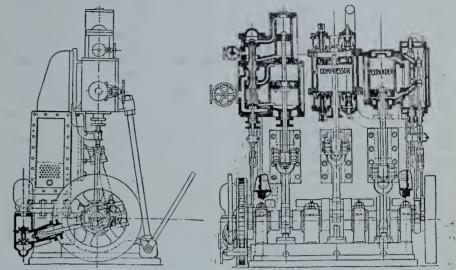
SECTIONAL VIEWS OF VERTICAL DRY AIR MACHINE.
